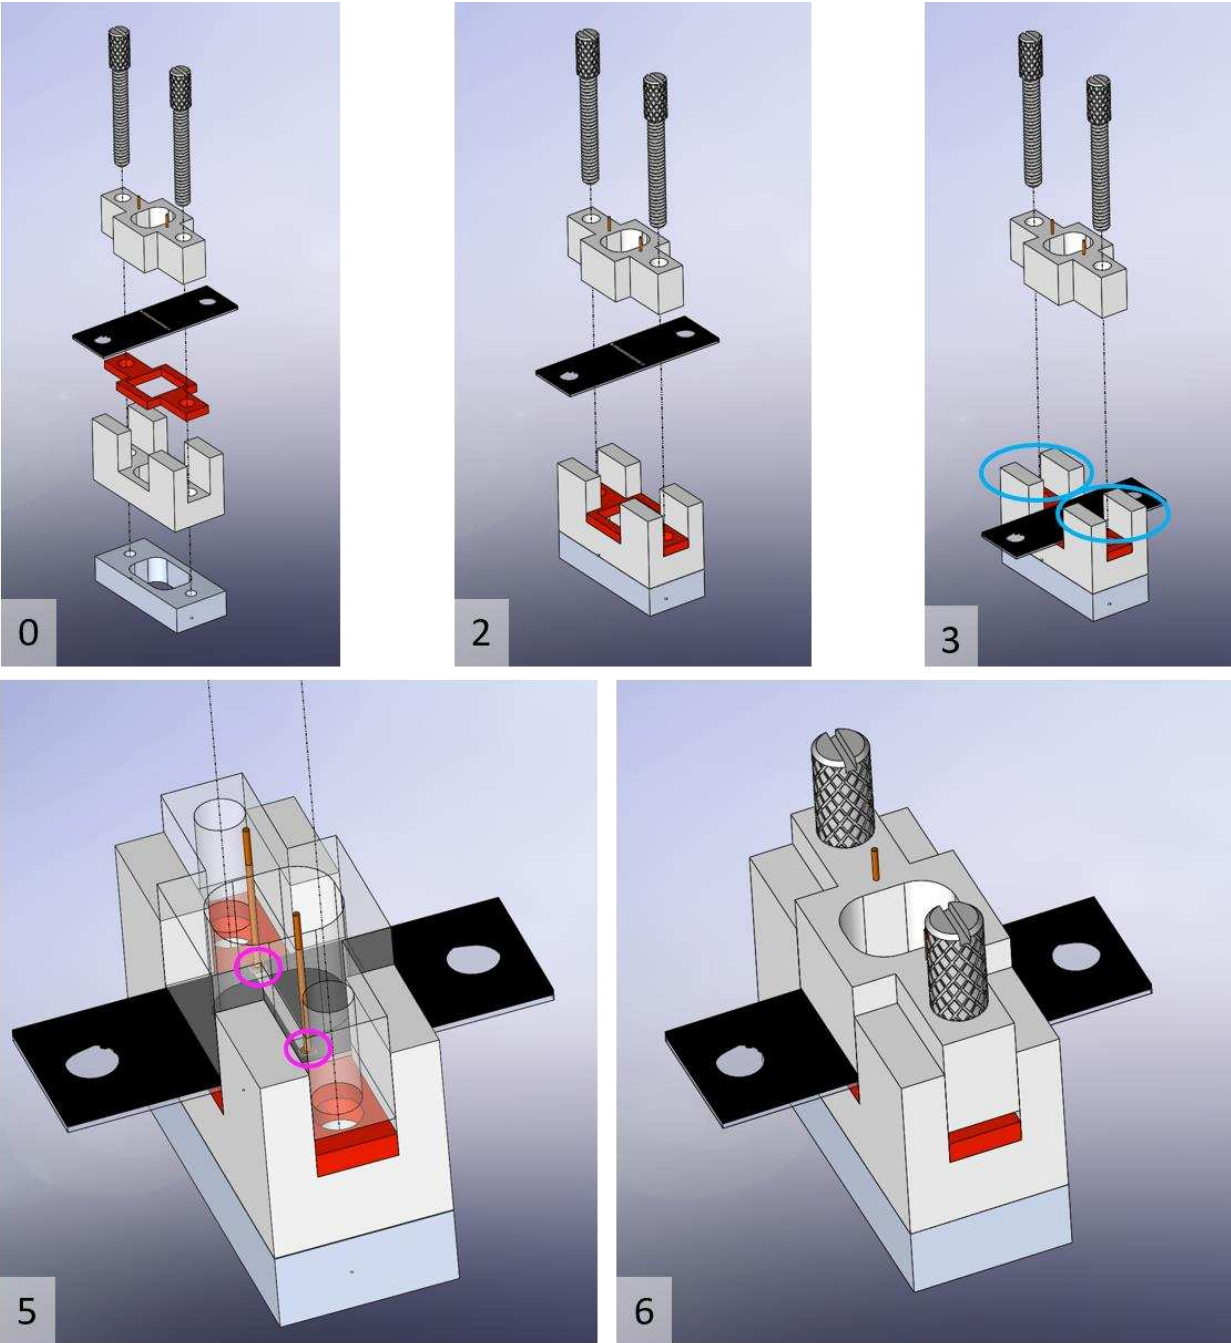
Electrical clamp install: (0) fully exploded view, (2) place the front ceramic structure on the aluminum clamp and install the gasket, (3) install the part into the front ceramic piece, (4) see Figure B-2, (5) slide back ceramic piece (rendered transparent) into the opening in the front ceramic piece and align the heater with the pins, and (6) install the thumb screws to tighten the structure around the part
